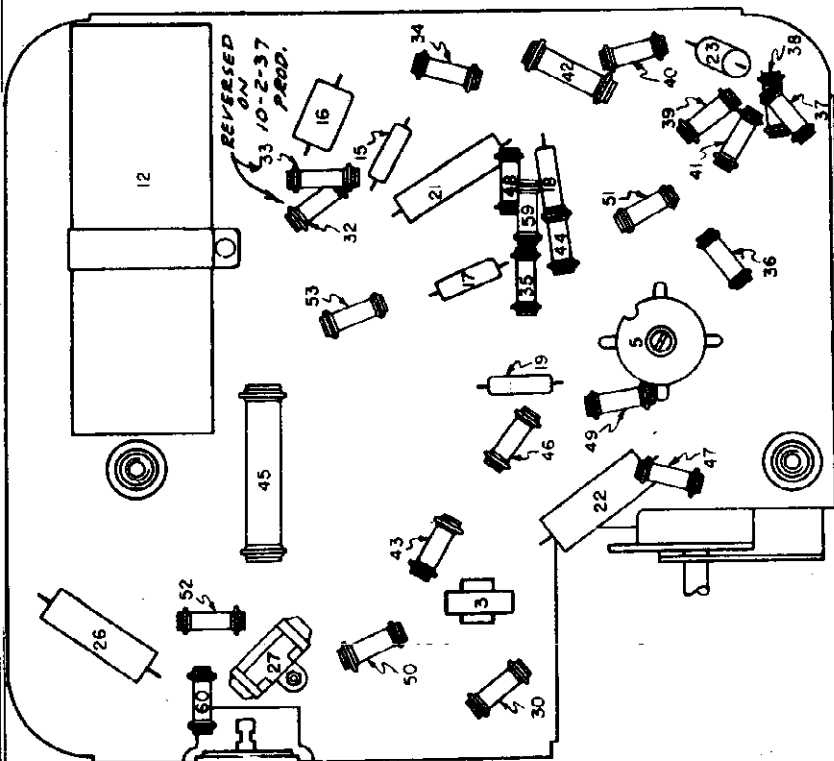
PARTS LAYOUT-BOTTOM VIEW
